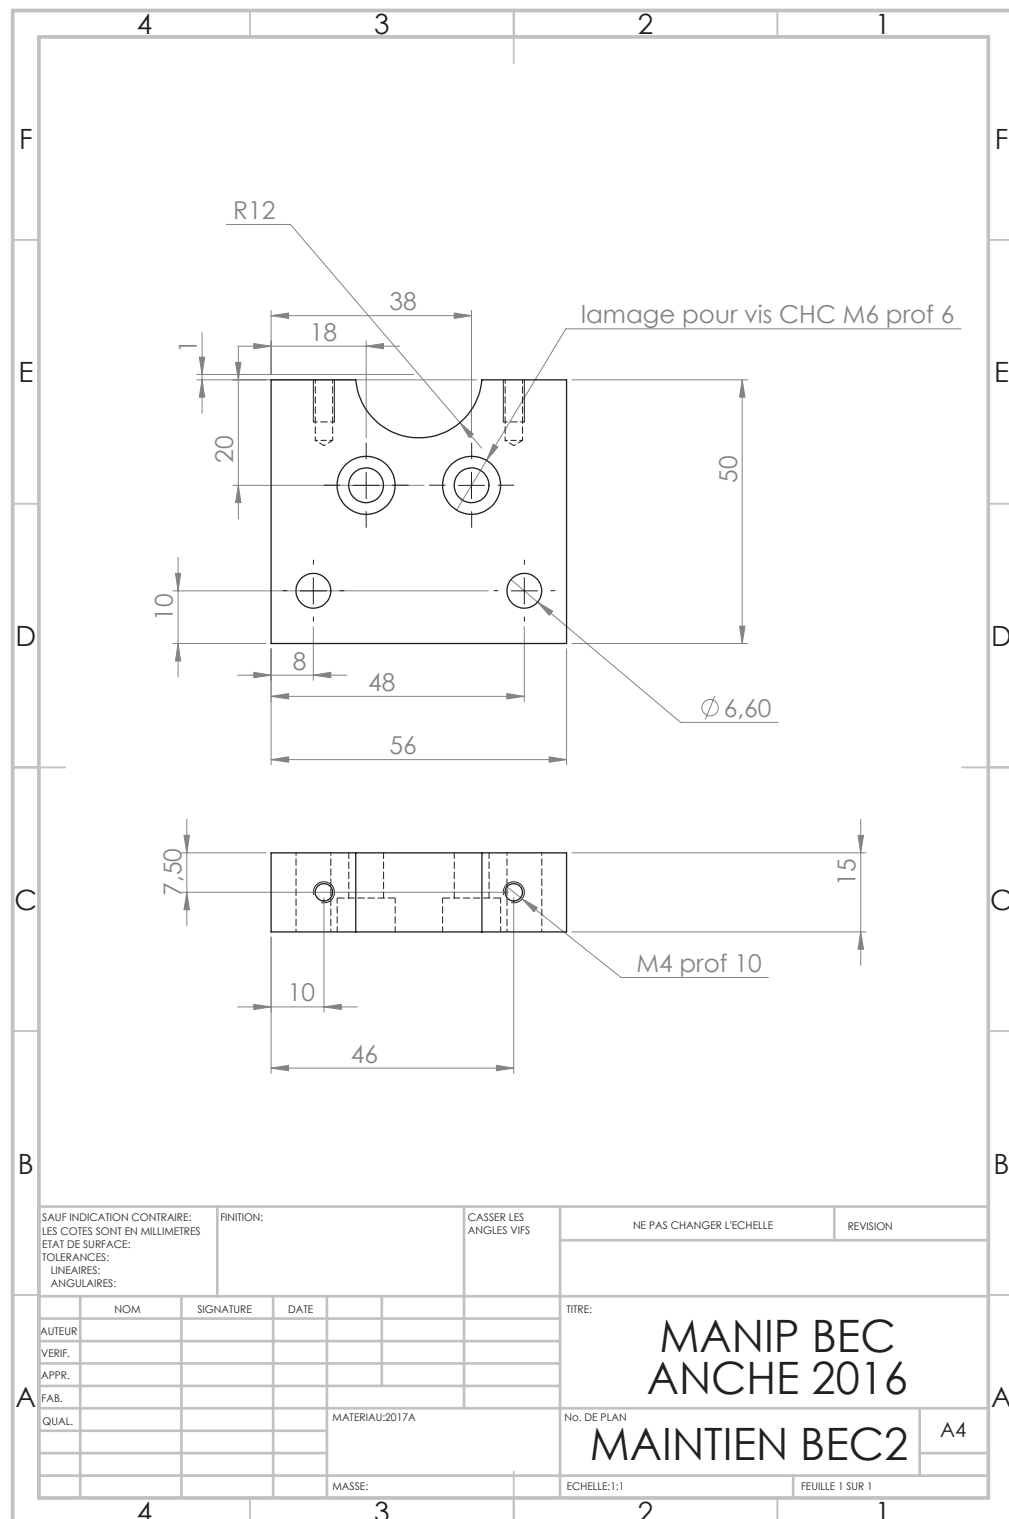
Dimensioned drawing of the clamp of the mouthpiece II (4). Provided by LAUM mechanical workshop.
